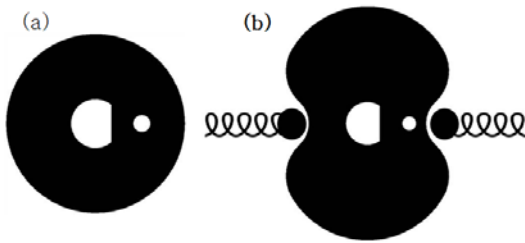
(a) a original crank wheel, (b) Novel design of a crank wheel
